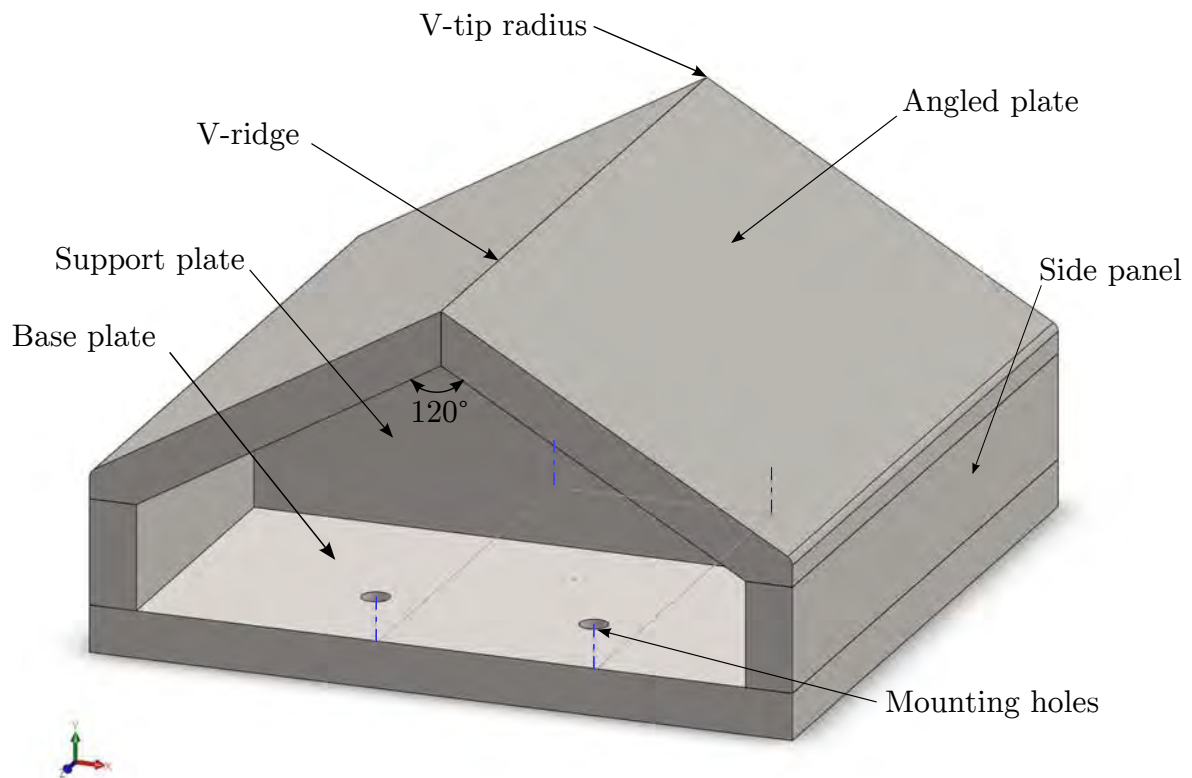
Three-dimensional CAD view of the 120° rigid V-plate
